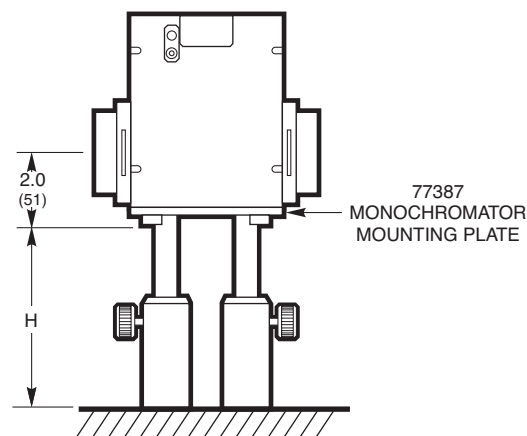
77250 Monochromator rod mounted to an optical table using the 77387 Mounting Plate.
